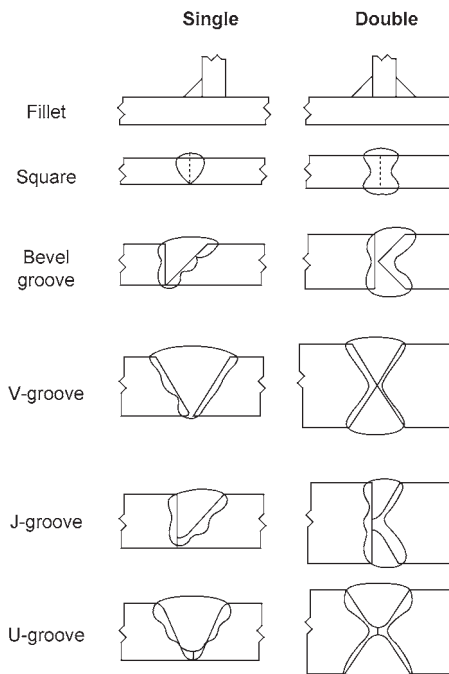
Types of welds. Source: Ref 1.1
